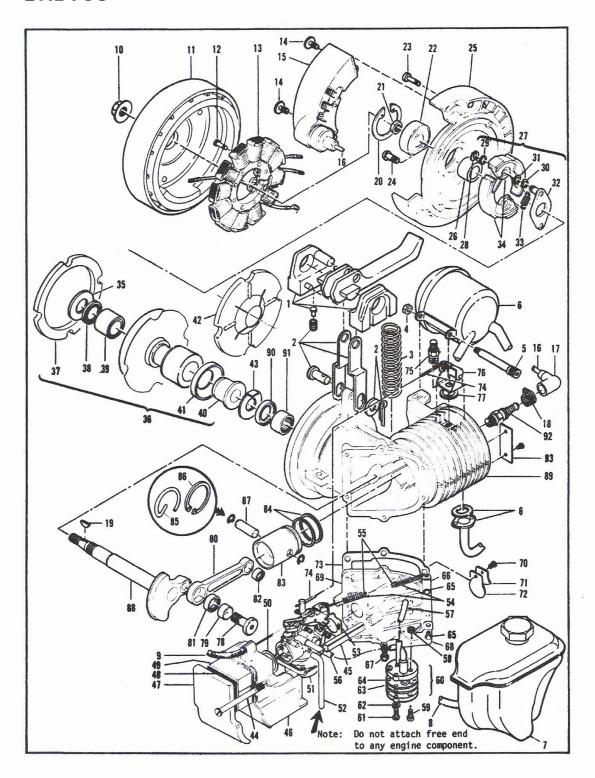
BHE 900 ENGINE ASSEMBLY
